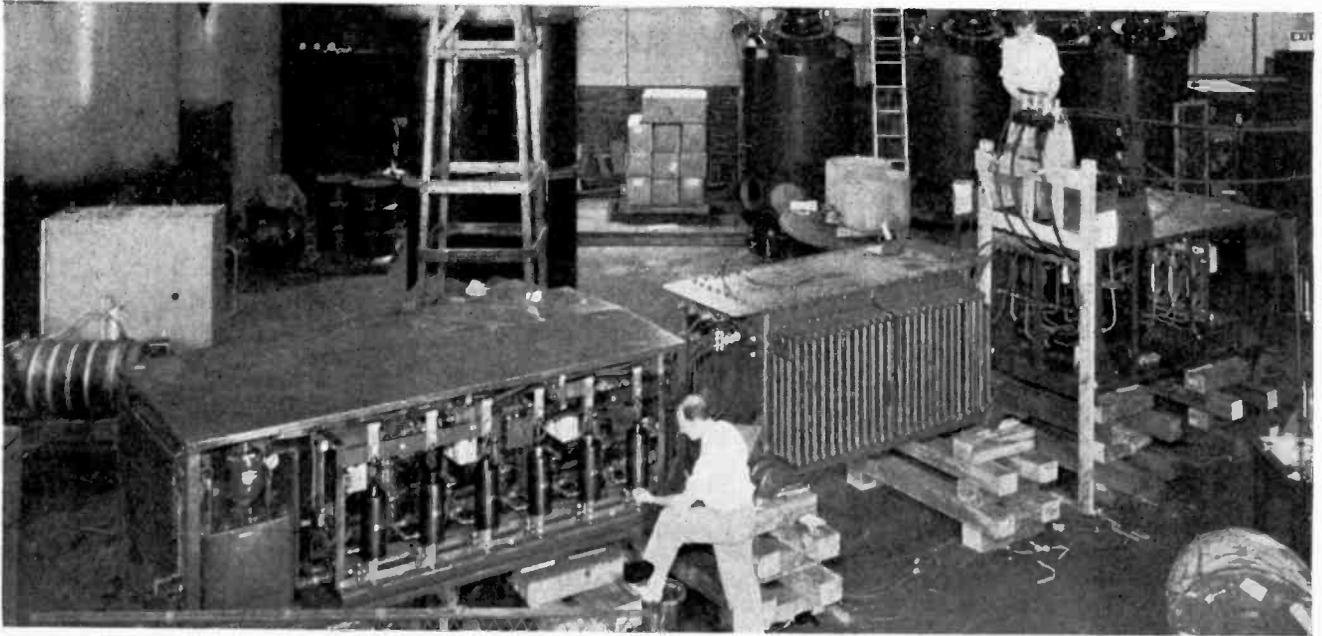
Demonstration set-up showing essential parts of high frequency welding system
